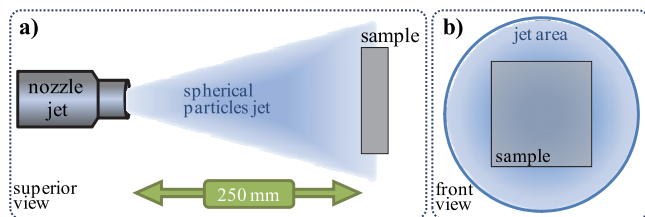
Schematic drawing of shot peening performed. In (a) top view, showing the positioning perpendicular of the jet nose relative to the sample; in (b) the front view, highlighting how the impact area of the jet is greater than the sample.
